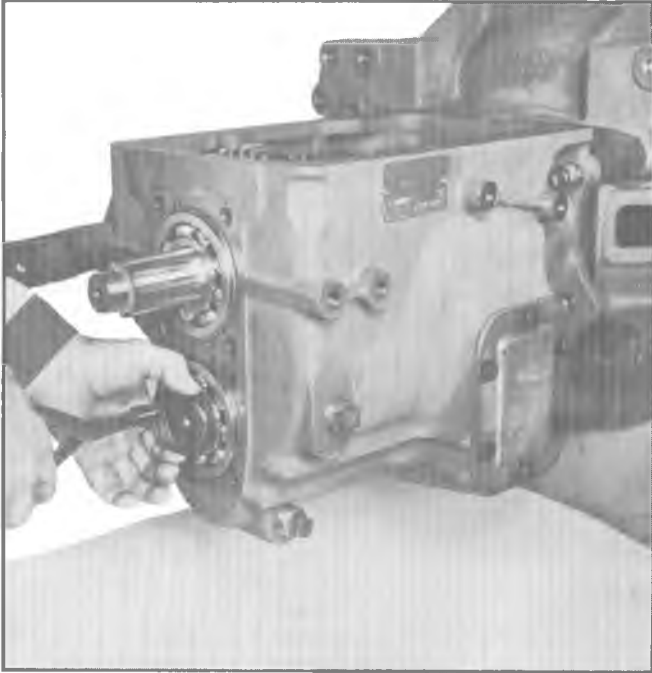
N—Removing Countershaft Rear Bearing Retainer Ring
